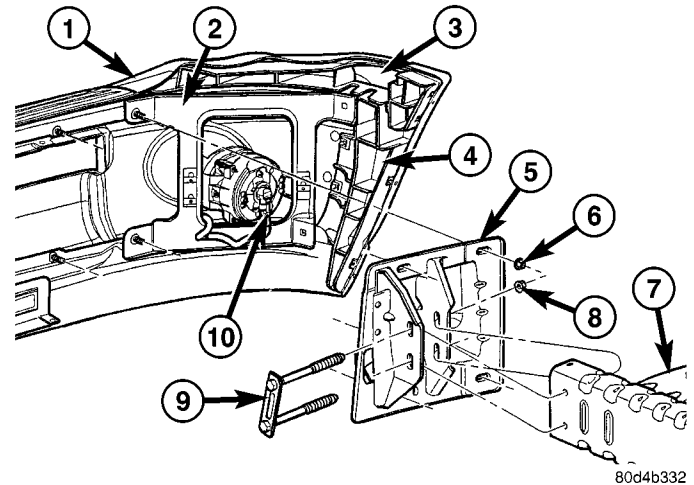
BUMPER SUPPORT BRACKET - TYPICAL
